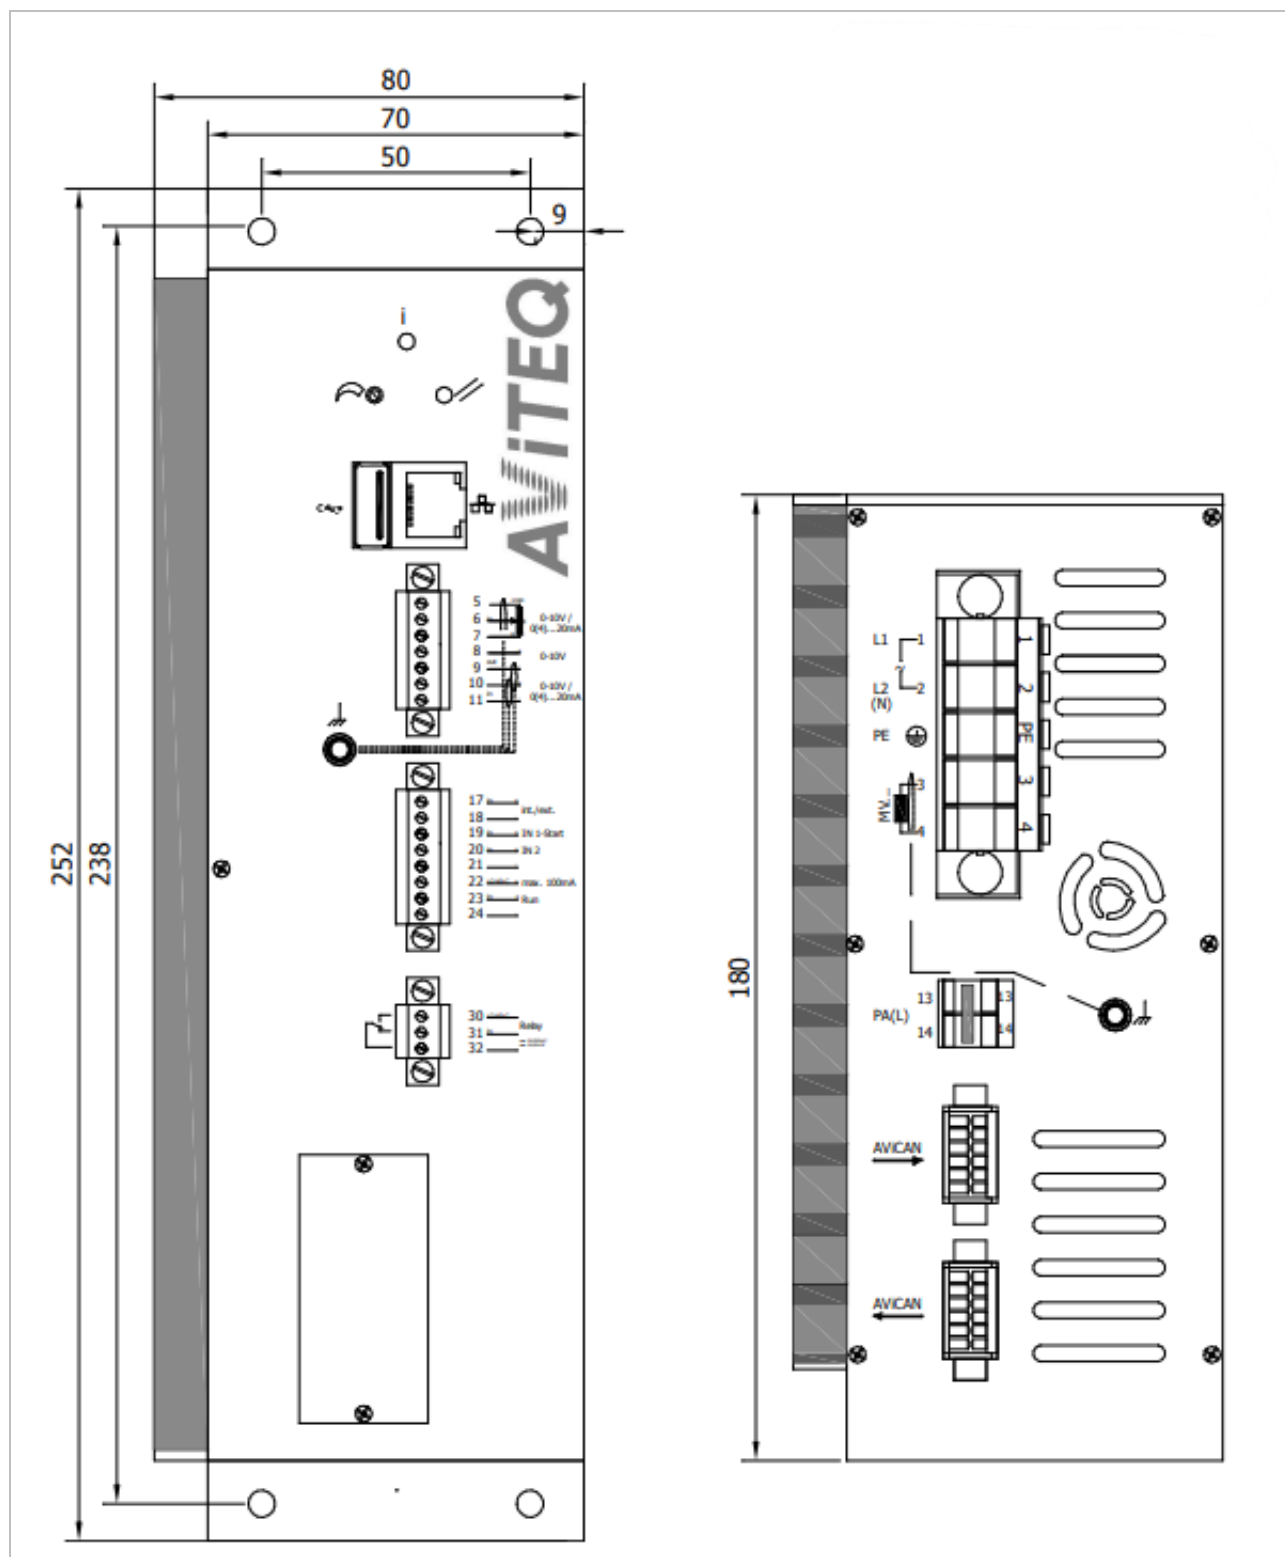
Dimensions SDE25/...-2 – left front view - right bottom view
